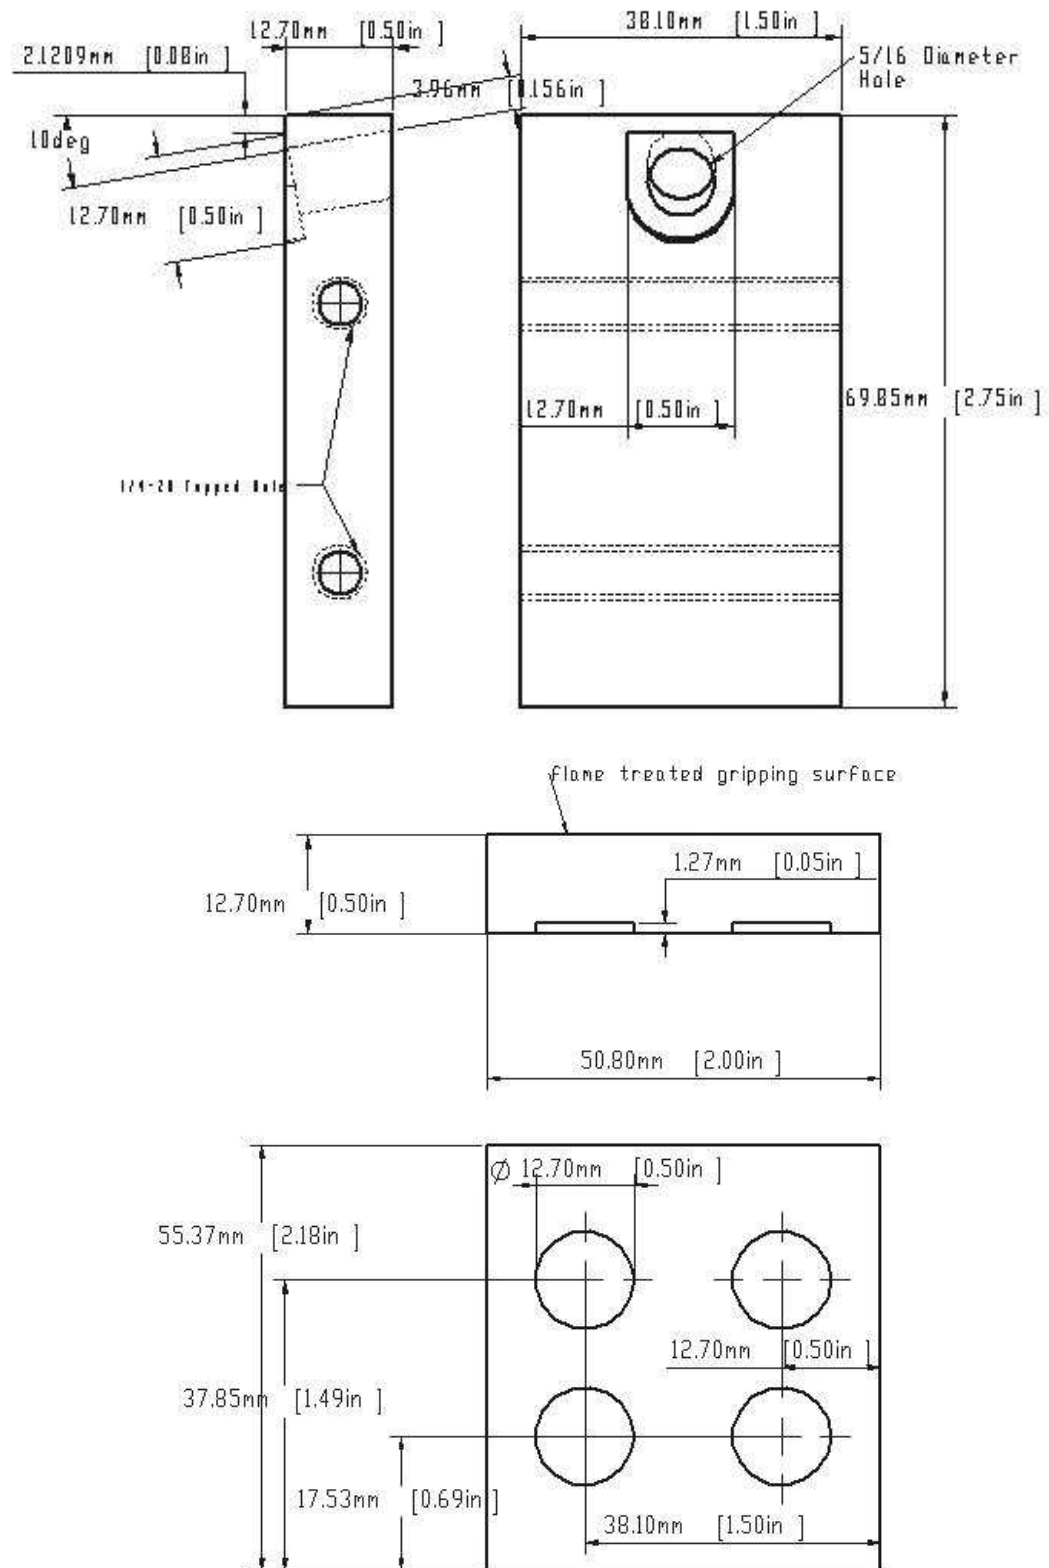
Drawings of the back pieces (top, 2 required) and the face loading pieces (bottom, 4 required)
